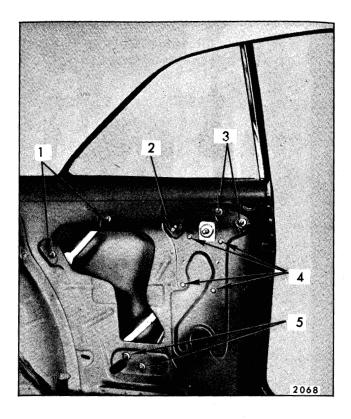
Rear Quarter Hardware - "A-17" Style
